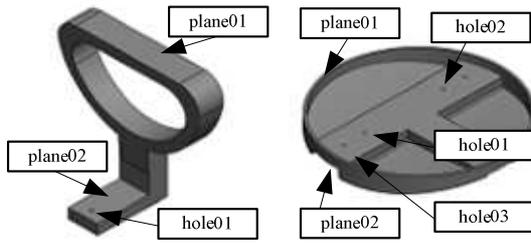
Example to Illustrate Plane Fitting and Axis Fitting
